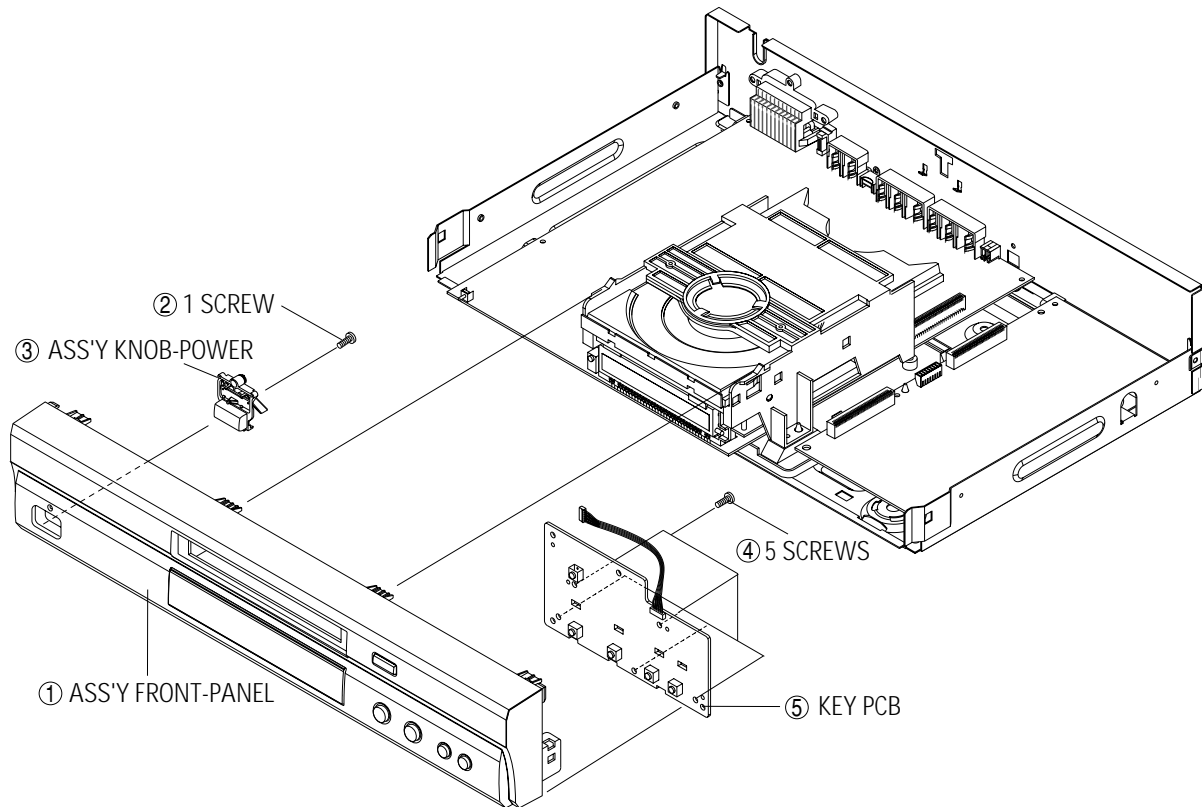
Ass'y Front-Panel, Key PCB Removal
